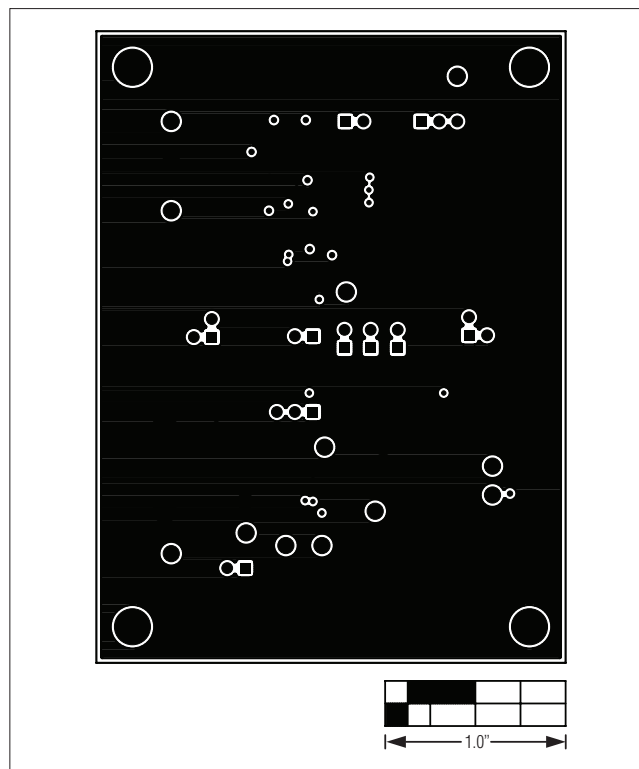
MAX14578A EV Kit PCB Layout—Ground Layer 2
